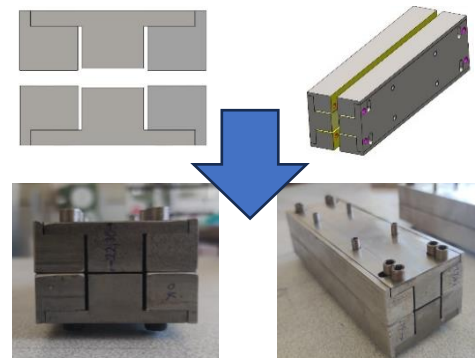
Specimen with support a) Front b) Three-dimensional view of the model
